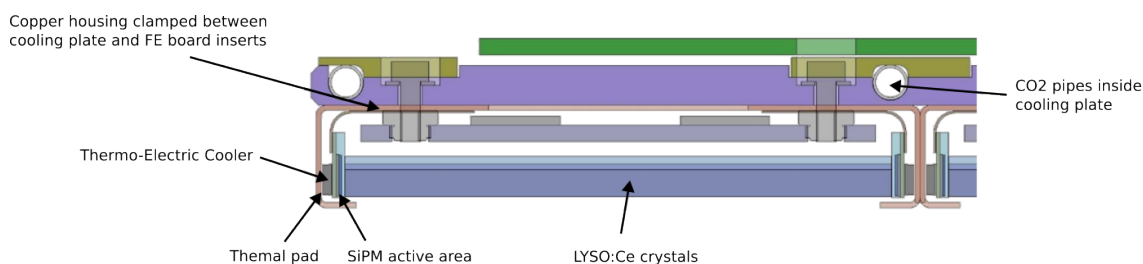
Transverse section of a BTL detector module attached to the cooling plate.
